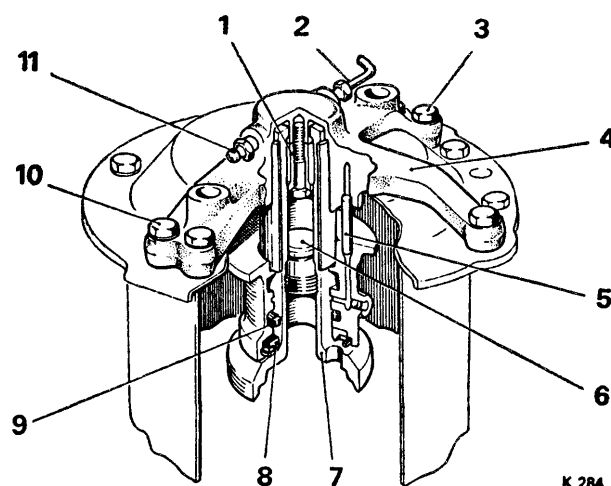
CUT-AWAY VIEW—FRONT HEIGHT CONTROL RAM—MODIFIED—EARLY CARS
